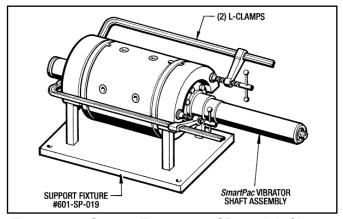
Support Fixture #601-SP-019 & L-Clamps
